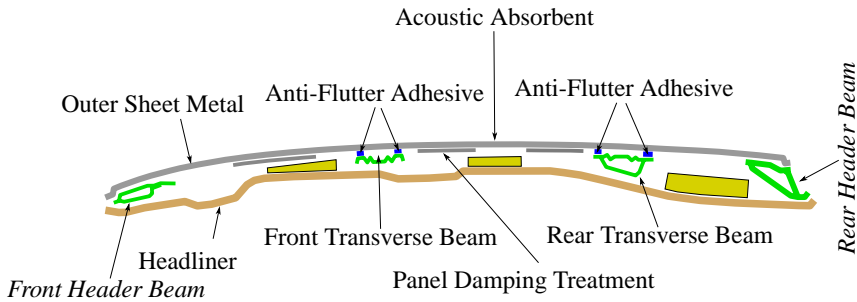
A Schematic cross-section of a conventional roof construction. Components in italics are not altered or replaced in the new concept.
